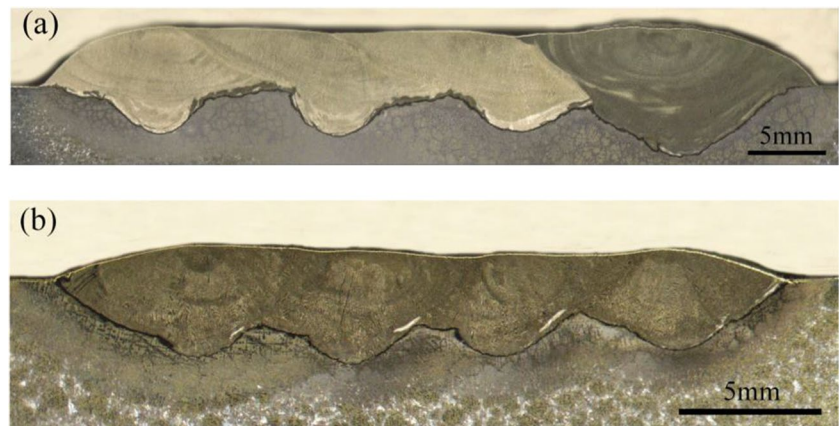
Macroscopic morphology of CMT and PAW multi-pass deposited specimens, a CMT, 955 J/mm, b PAW, 1374 J/mm
